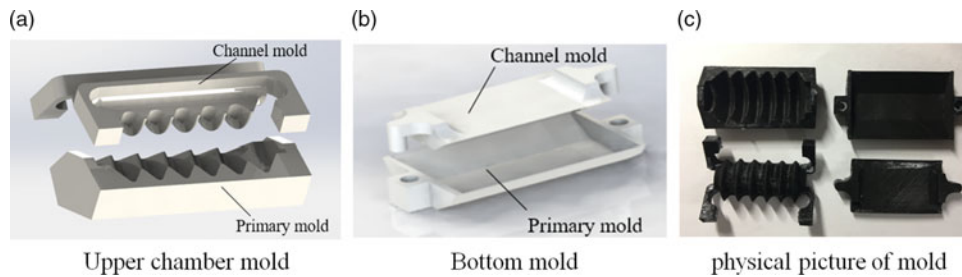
Upper chamber mold and bottom molds. (a) Upper chamber mold. (b) Bottom mold. (c) Physical picture of mold.
